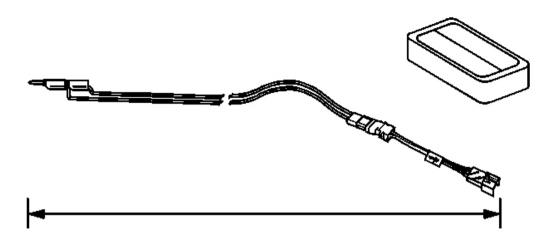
Extending SIR Deployment Harness & Adapter Courtesy of GENERAL MOTORS CORP.
